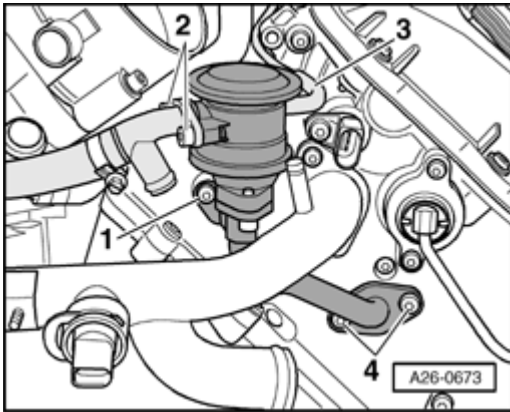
Disconnecting Vacuum Hose And Remove Bolts & Combination Valve
